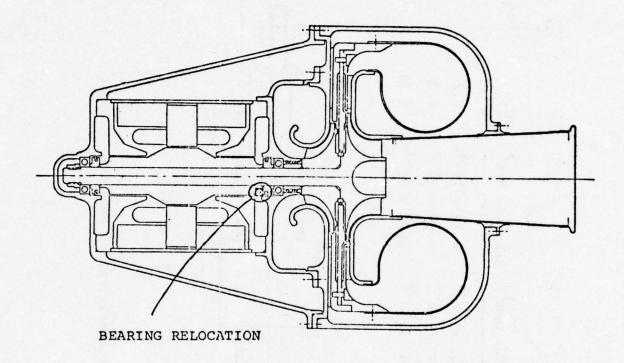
1.5/3 kW Turboalternator (Drawing No. SKP32440).
